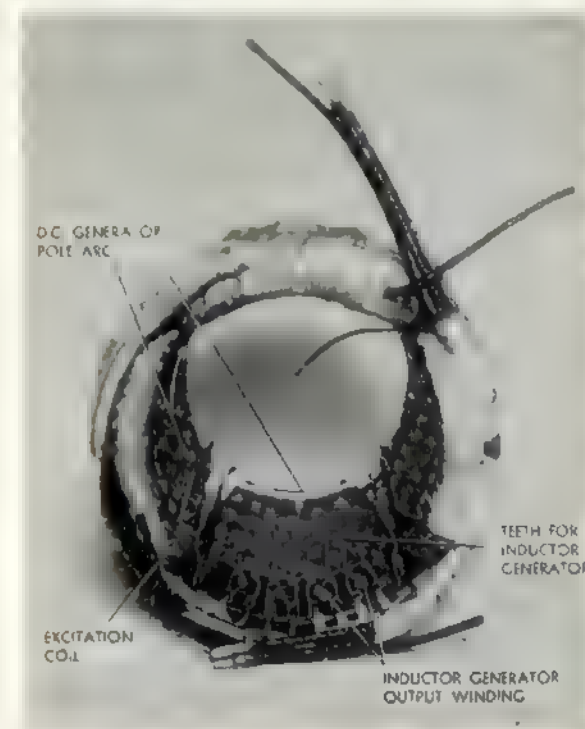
The stator of the machine shown in Fig. 6.41.
